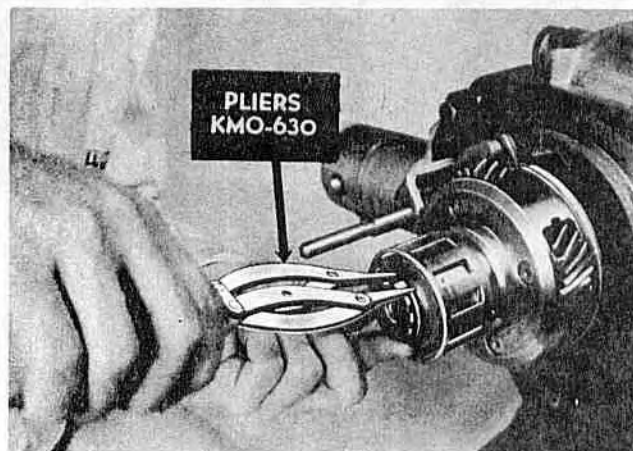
Removing the Over-Running Clutch Cam Retaining Snap Ring
